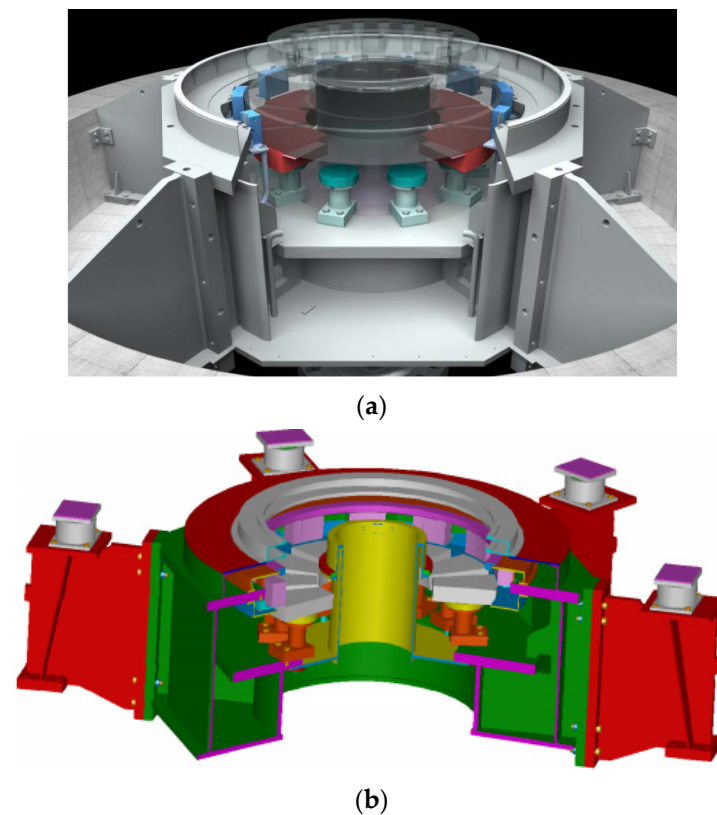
Three-dimensional model of the thrust bearing and combination bearing. (a) Three-dimensional model of the thrust bearing for a pumped storage station [113]; (b) three-dimensional model of combined bearing [13].
